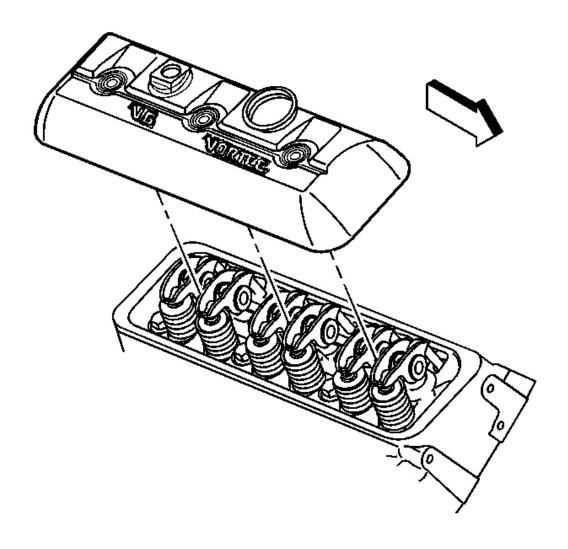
Valve Rocker Arm Cover (Right) Courtesy of GENERAL MOTORS CORP.
